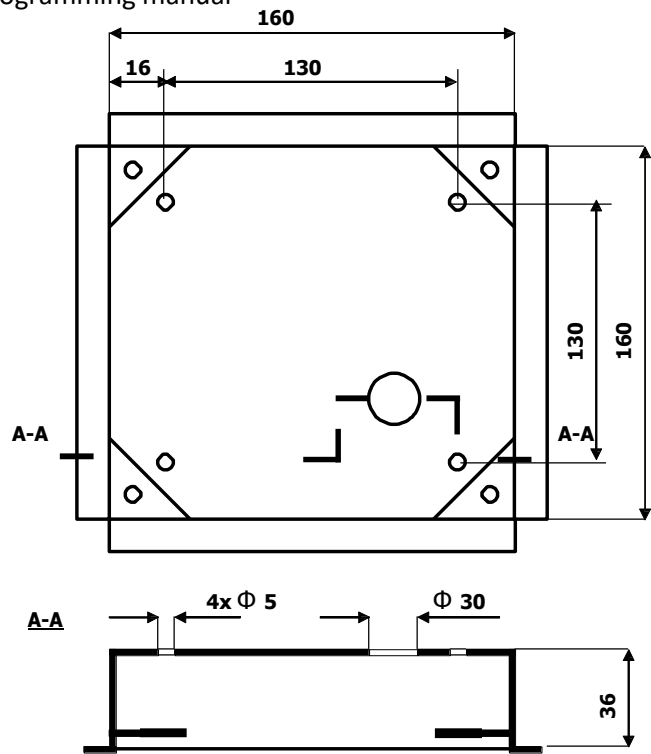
PC-1000 panel – flush-mounted frame dimensions
